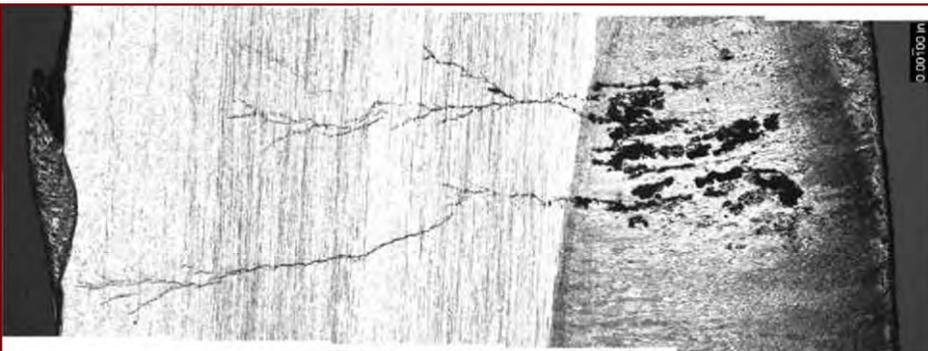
SCC progressing from inside weld porosity out toward the outside surface (left).
